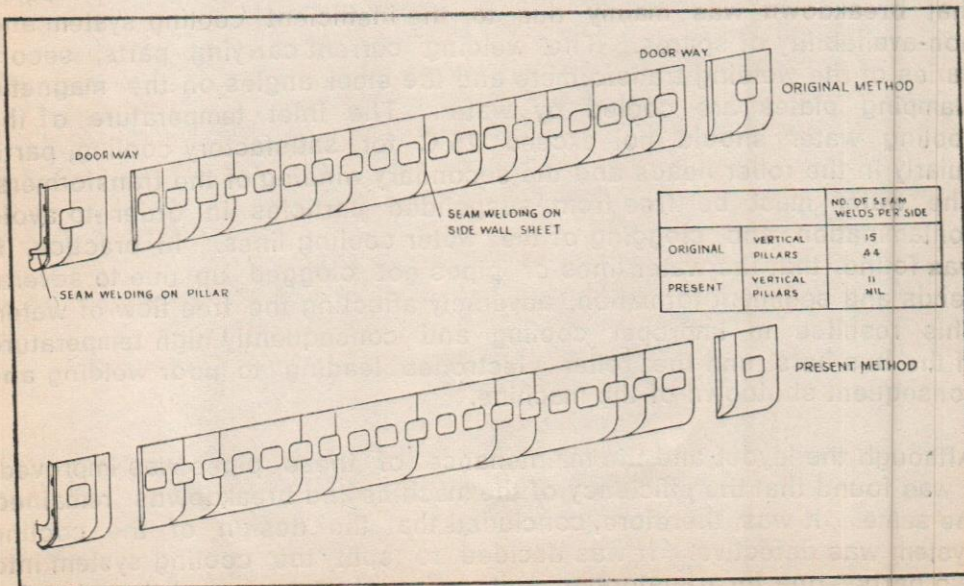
Diagram of Butt Seam Welds on a BG-Second Class Sleeper Side Wall
